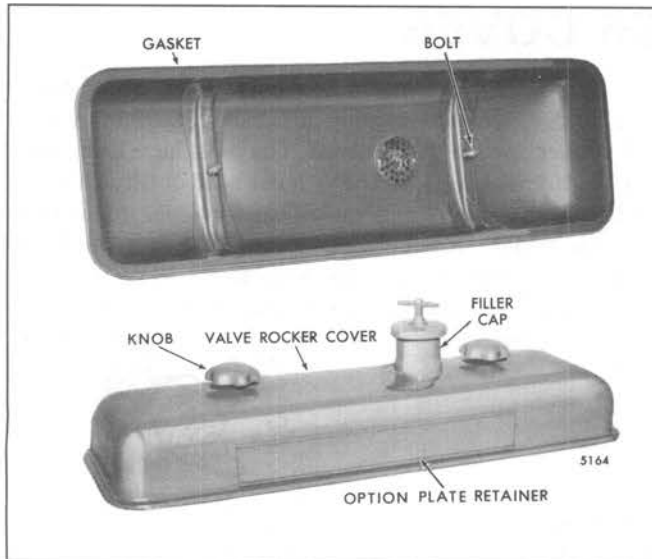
Typical Valve Rocker Cover Assembly (Former)
